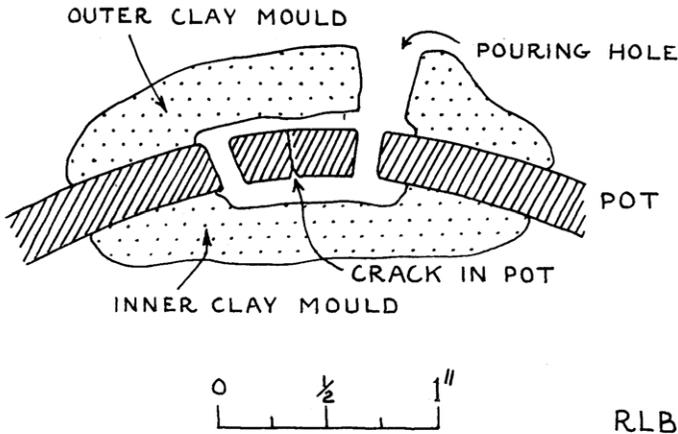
Section of a drilled pot, with moulds in position ready for pouring in the lead.
